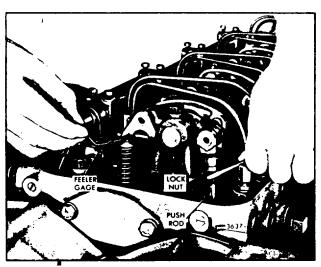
Adjusting Valve Clearance (Four Valve Head)
